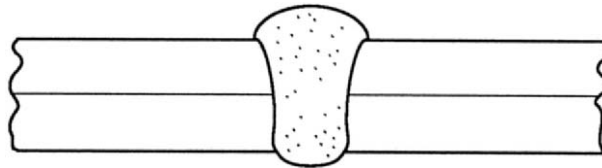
WELDING PROCESSES PER 17-1(c)
